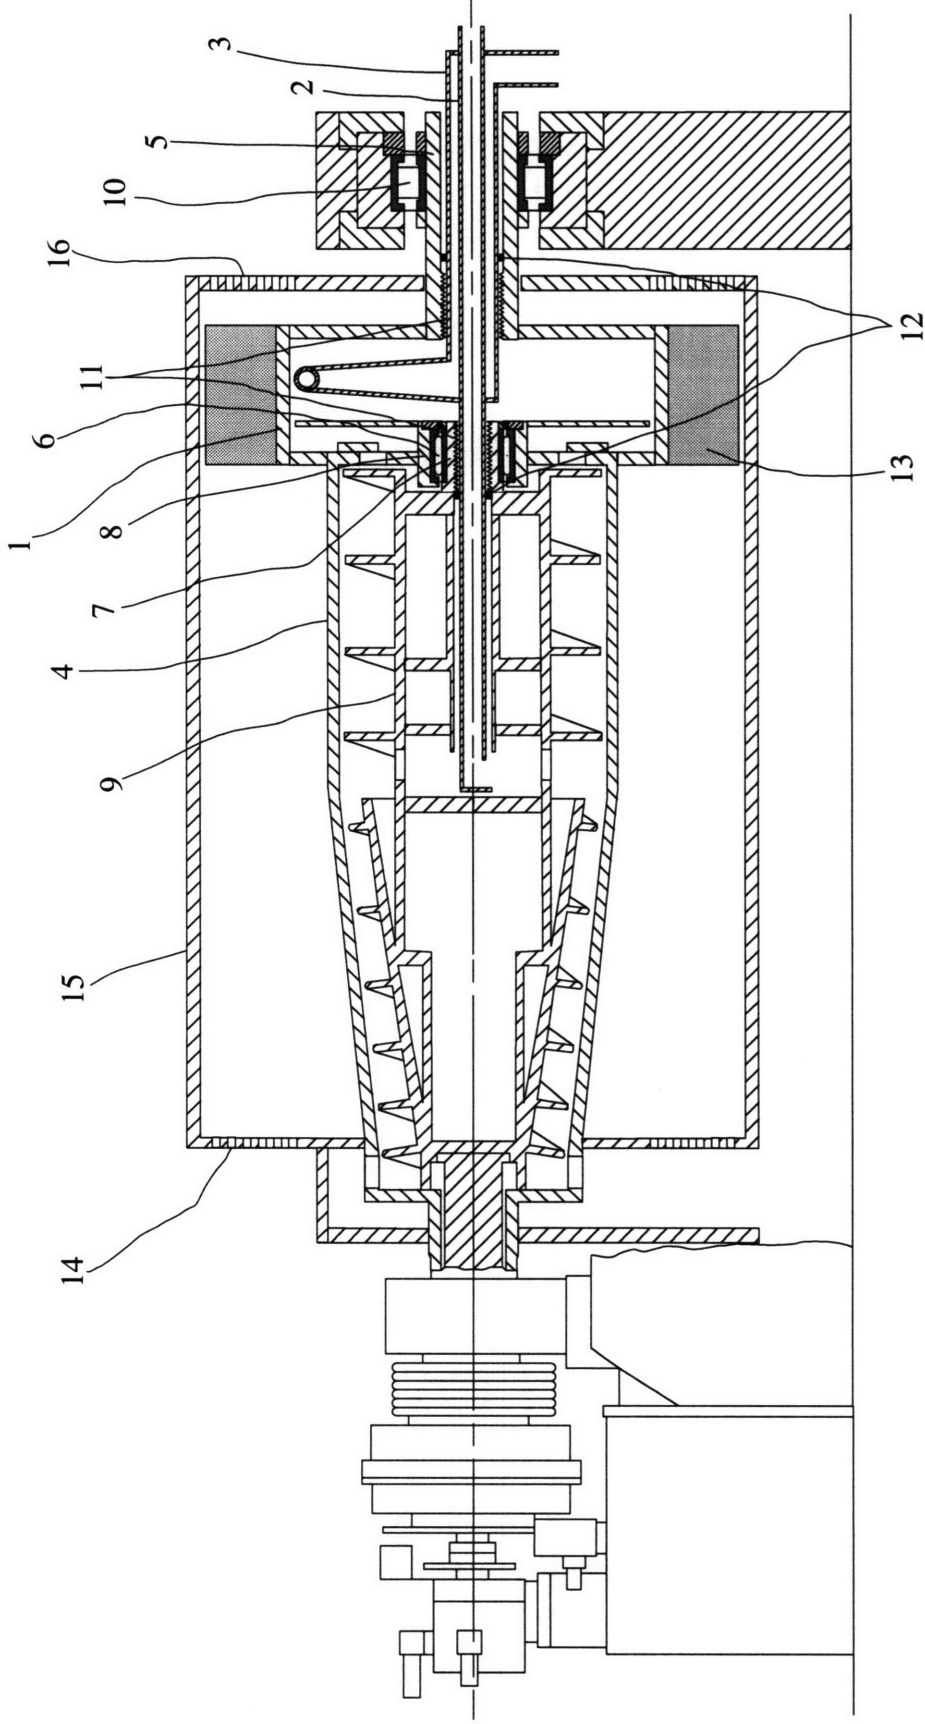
Cross-section of the integrated decanter-type centrifuge-pitot pump developed in this thesis: 1 - pitot pump bowl; 2 - feed pipe; 3 - discharge pipe; 4 - centrifuge bowl; 5 - sleeve shaft; 6 - needle roller bearing; 7 - conveyor sleeve shaft; 8 - bowl assembly shaft; 9 - conveyor; 10 - straight roller bearing; 11 - visco seal; 12 - lip seal; 13 - fan blading; 14 - air inlet holes; 15 - blow-proof housing; 16 - air exit holes
